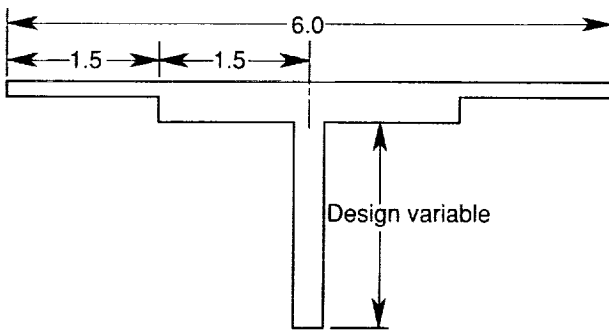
Design requirements on dimensions of cross section for heavily loaded panel. One repeating element is shown. Dimensions are in inches.
